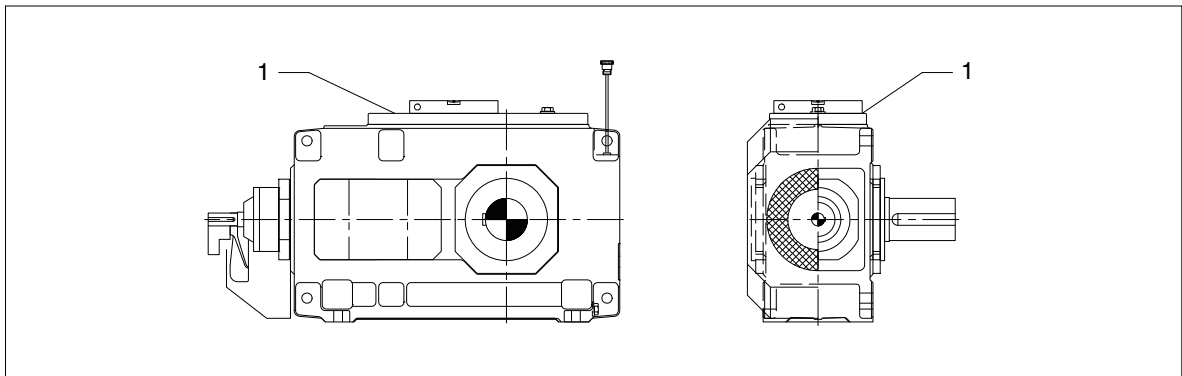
Alignment surfaces (1) on gear units up to size 514
